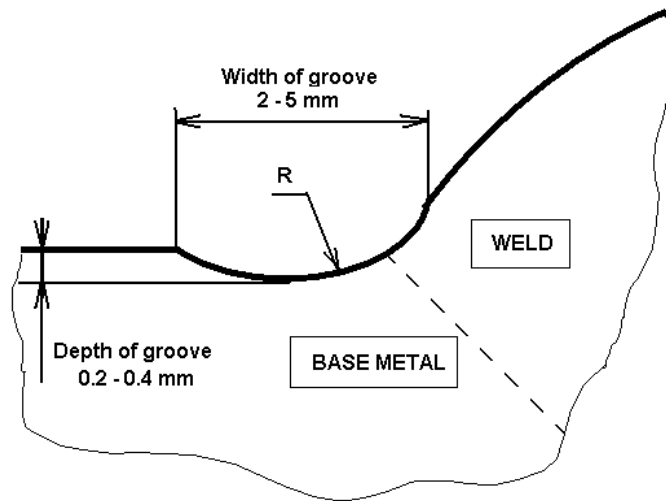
Profile of weld toe improved by Ultrasonic Peening [9].
